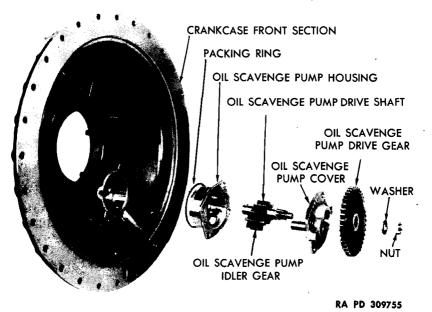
Front Section Scavenge Oil Pump Disassembled
